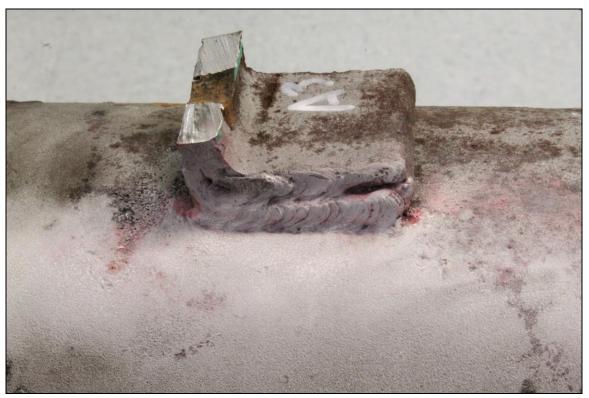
Image of the Lug A3 exterior top welds after dye penetrant media had been used during inspection.
